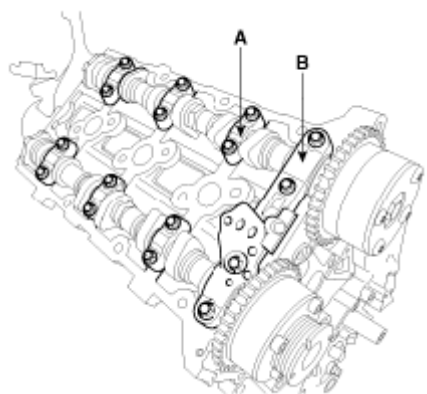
Identifying RH Camshaft Bearing Cap & Thrust Bearing Cap
